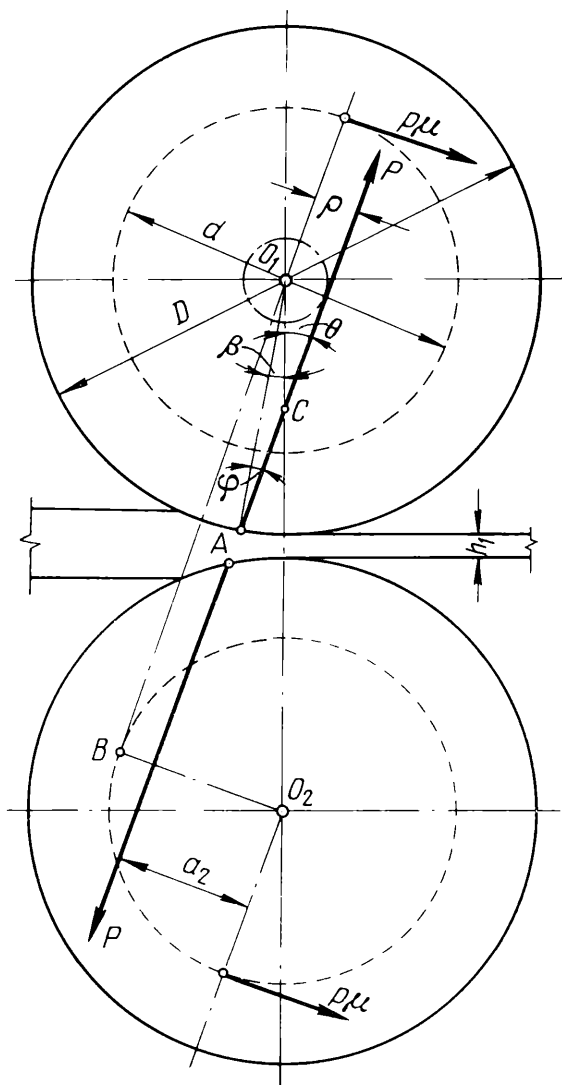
Direction of the forces acting on the rolls, taking account of friction in the bearings, when only the bottom roll is driven
